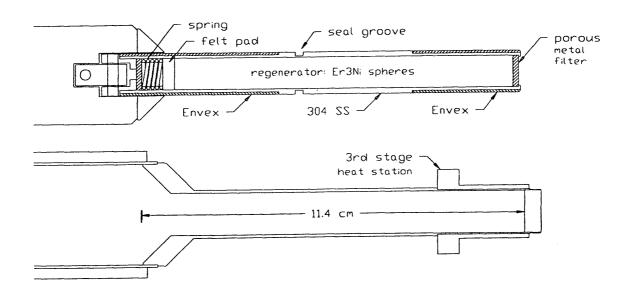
Cross sectional views of a 3rd stage cylinder and typical displacer.
